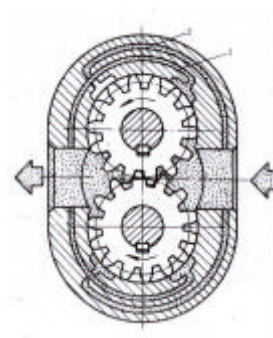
The principle of an involute circular arc gear-on-gear pump schematic drawing
